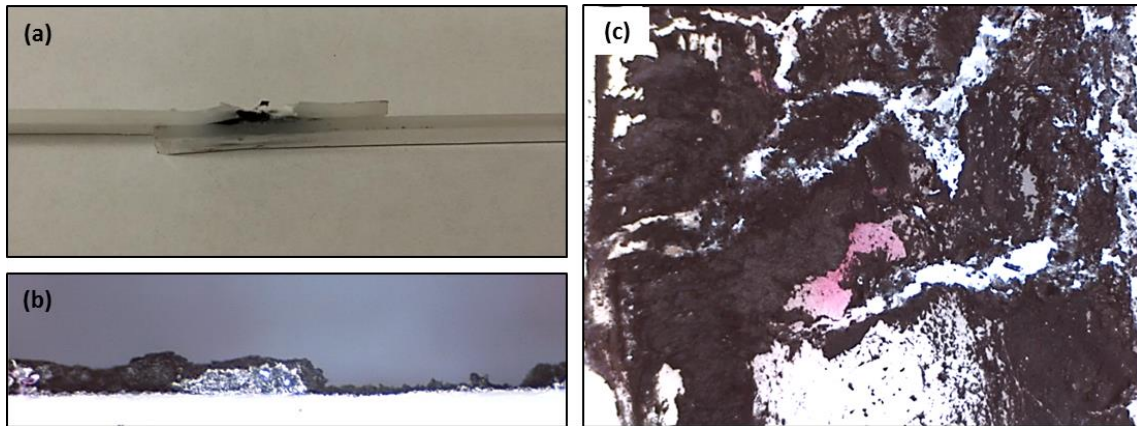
IW of PE coupons using the CNT buckypapers: optical images of (a) the specimen after the IW, (b) side-view and (c) top-view of the specimen welded area after mechanical rupture.
